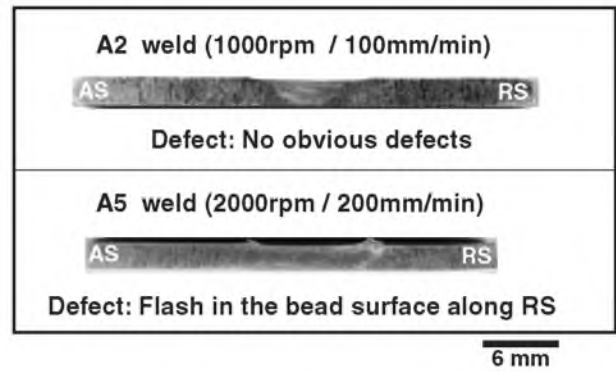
Appearance of cross-sections of typical A-welds. AS: advancing side, RS: retreating side.
